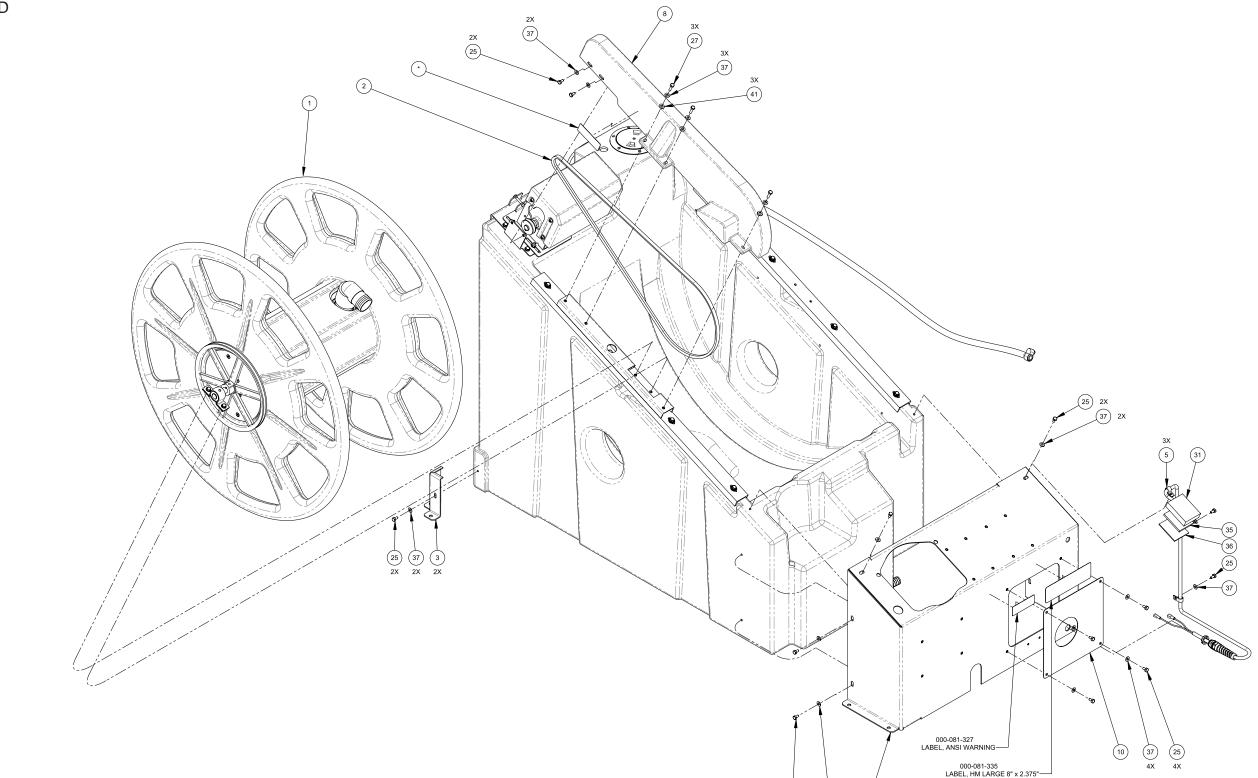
HydraCradle Tank Assembly - View 2 of 4 000-163-609 Rev. D
